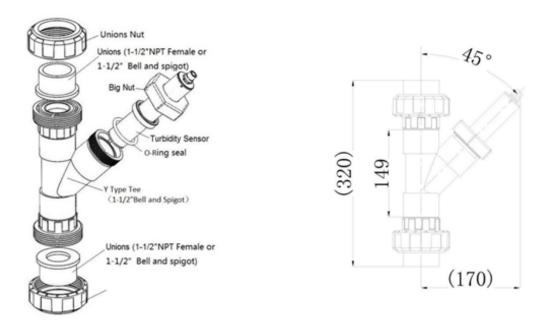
FT-100 Inline Tee Assembly Dimensions (mm) & Diagram
